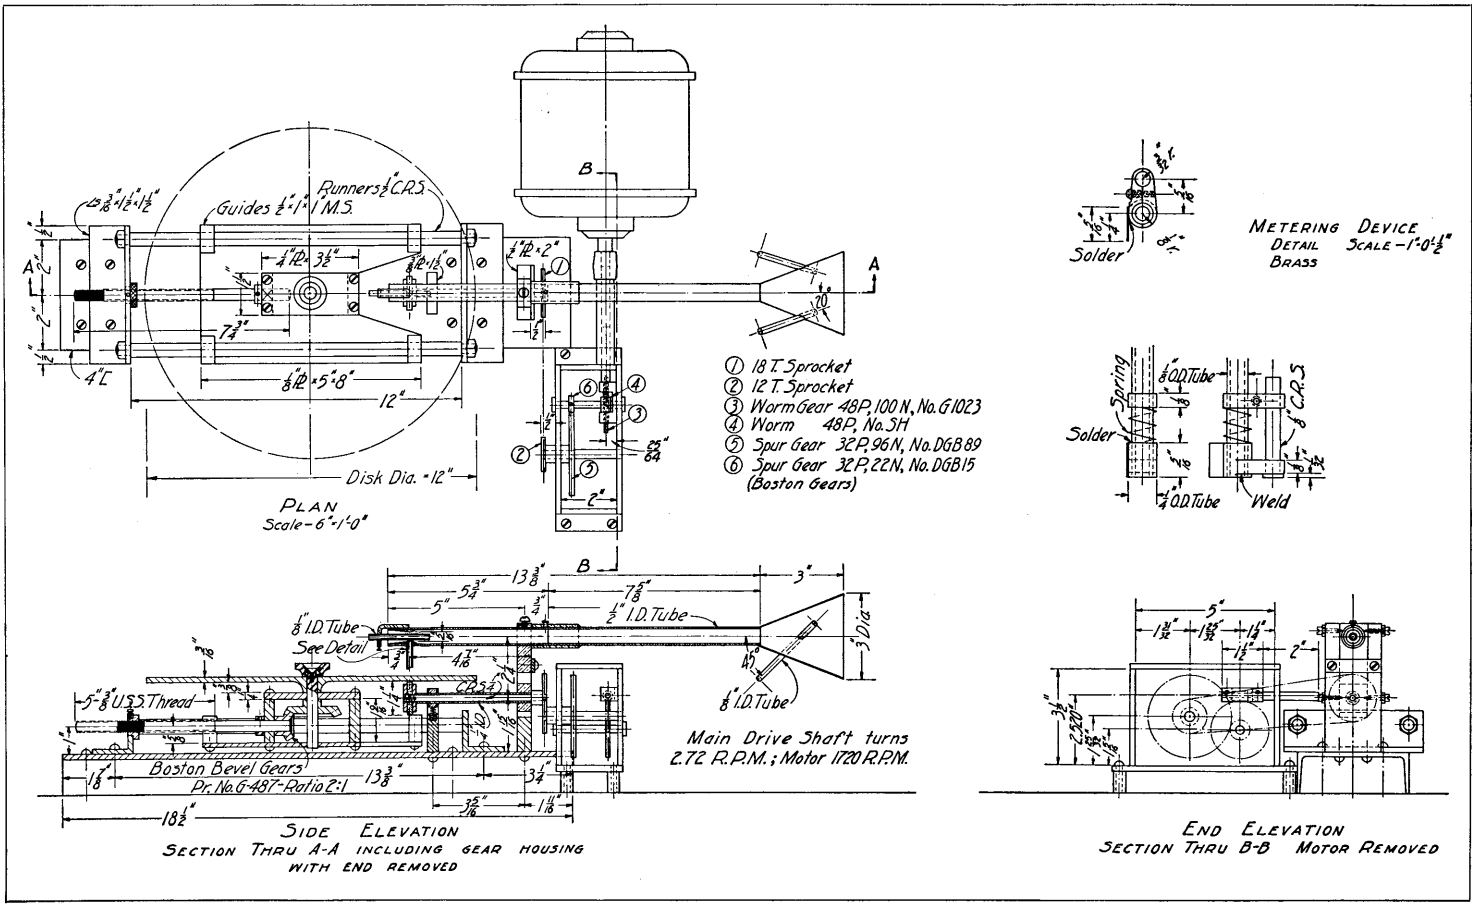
DETAIL DRAWING OF DUST FEEDER
